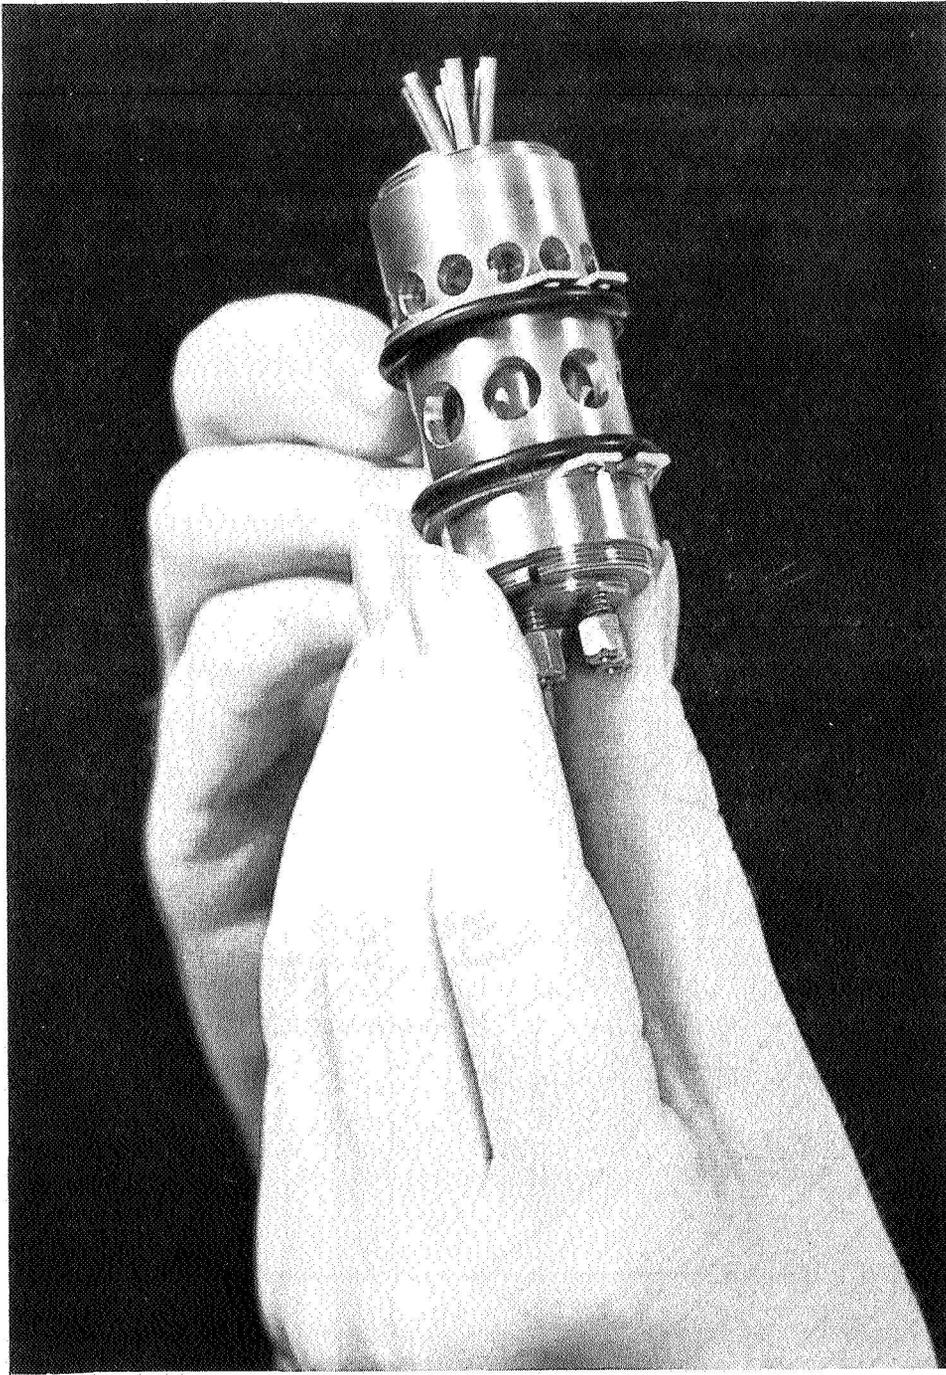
SINGLE STAINLESS STEEL PNEUMATIC
